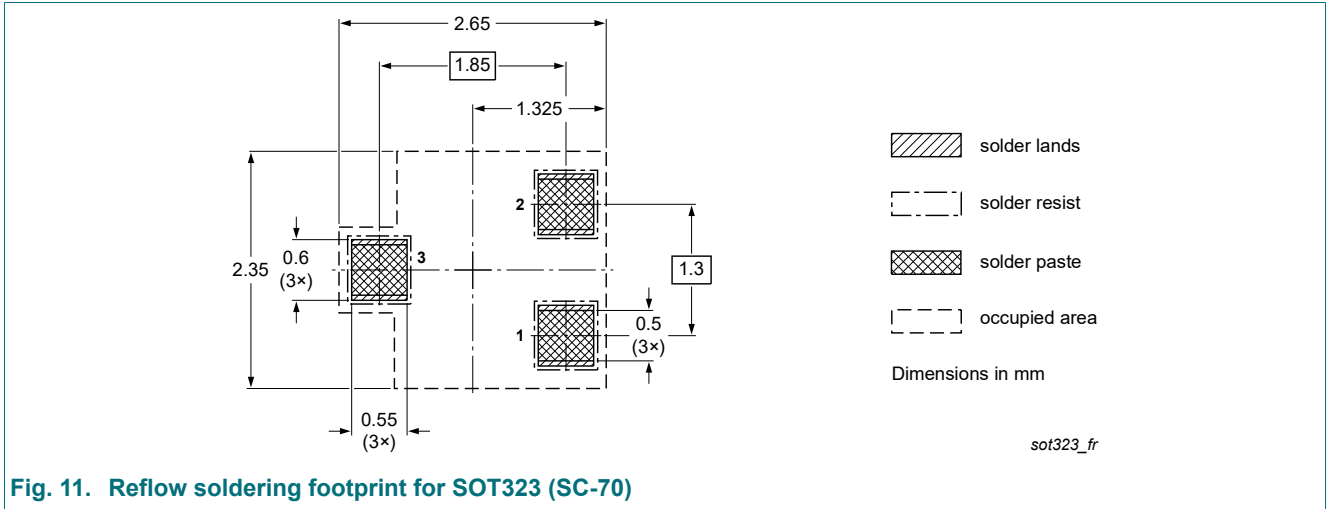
Reflow soldering footprint for SOT323 (SC-70)
